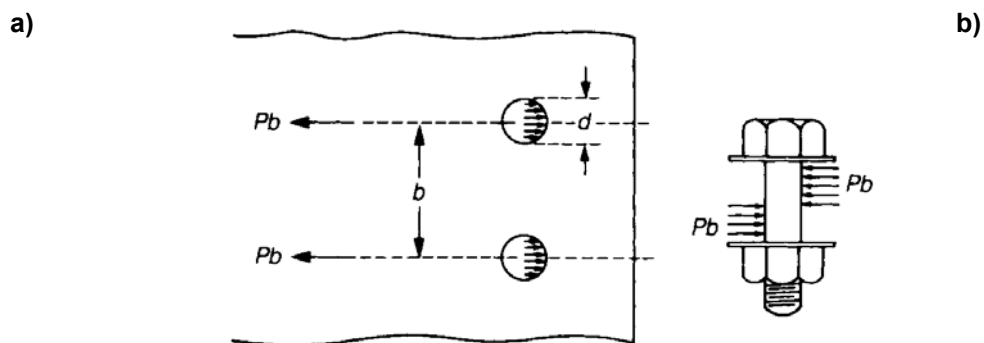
(a) Bearing pressure on the holes of the upper plate.
